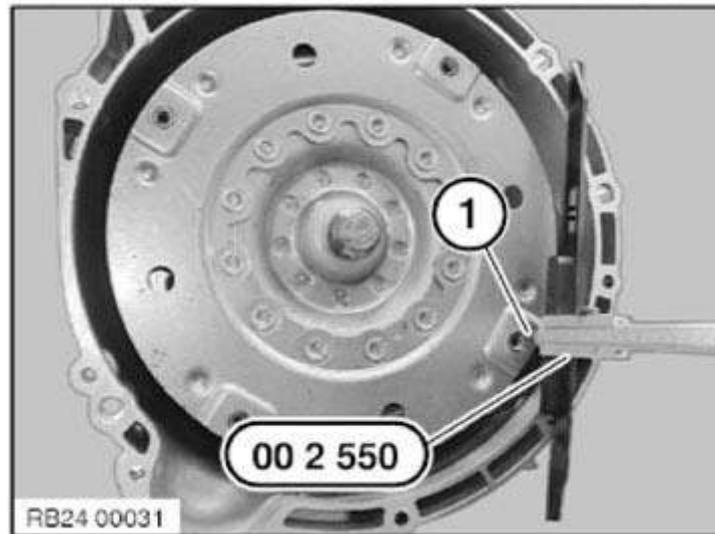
Checking Distance Between Contact Surface And Threaded Hole Surface In Torque Converter
